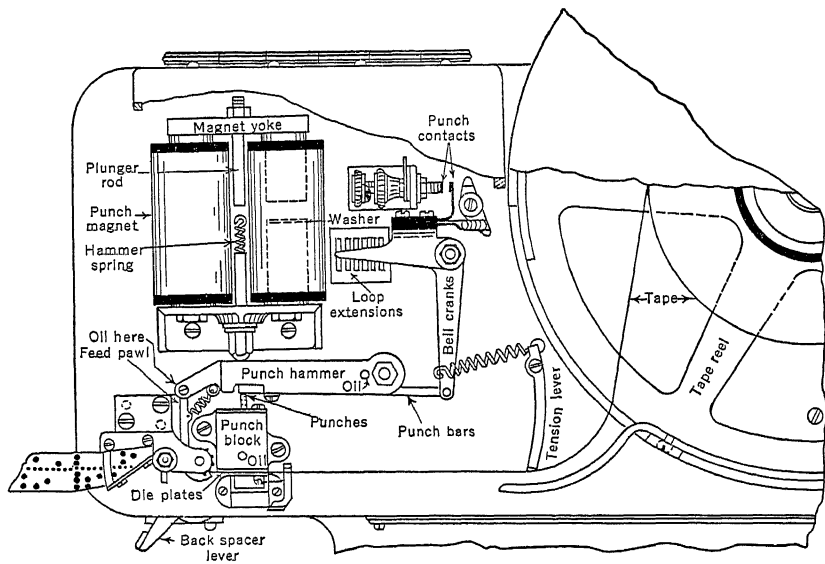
Perforator Punching Mechanism (Courtesy Bell System)
